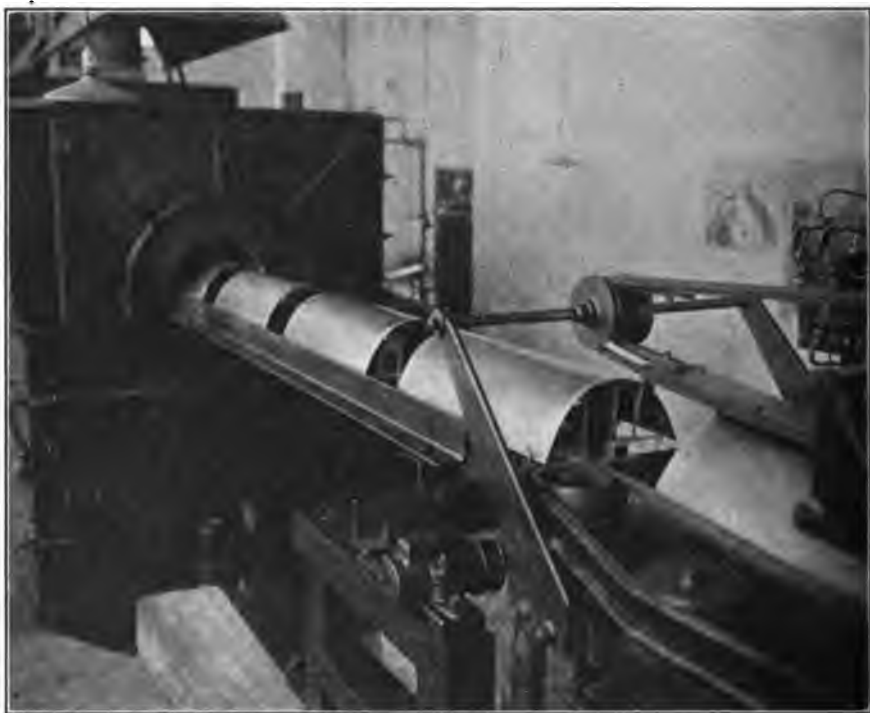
THE SHEET-ARCHING MACHINE AND FURNACE CONVEYOR, SHOWING BOWED SHEETS ON THEIR SUPPORTS ENTERING THE FURNACE.
